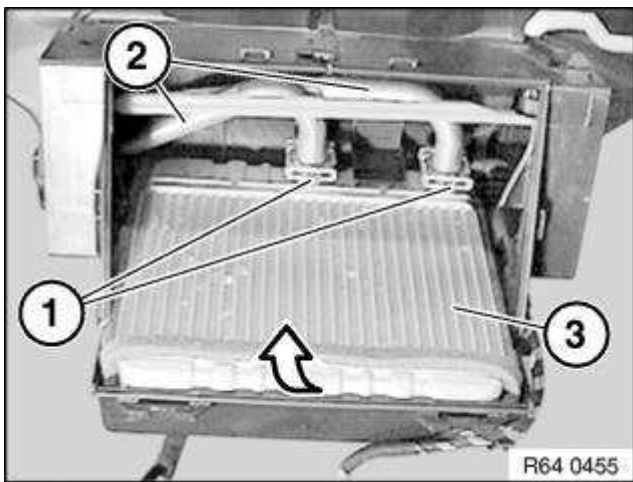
Remove Retainers (1) And Remove Double Pipe (2) Towards Top
